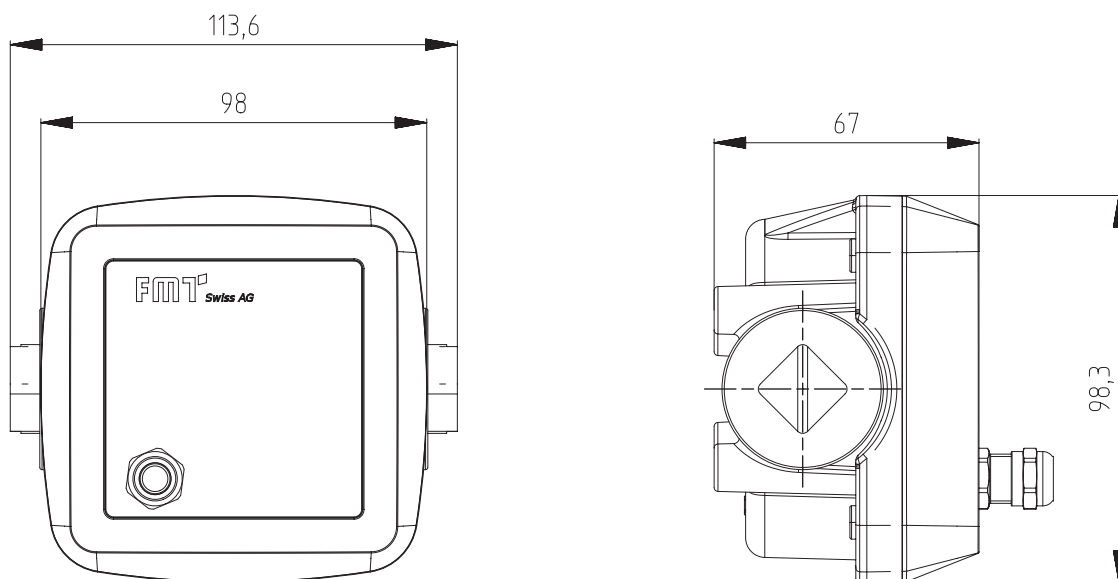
Mounting dimensions pulse meter and oval gear meter – digital without display (in mm)
